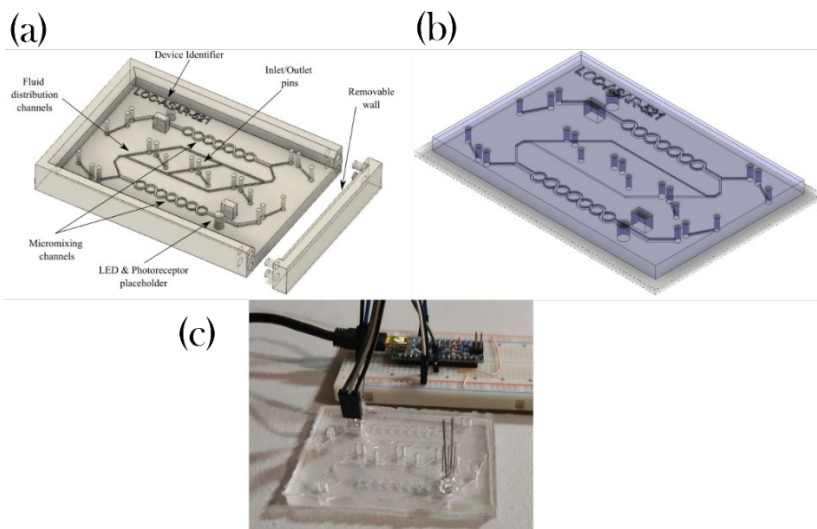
(a) Mold for nitrite assay sensing module; (b) CAD of final device after casting and sealing with glass; (c) Final sensor device with electronic components.
